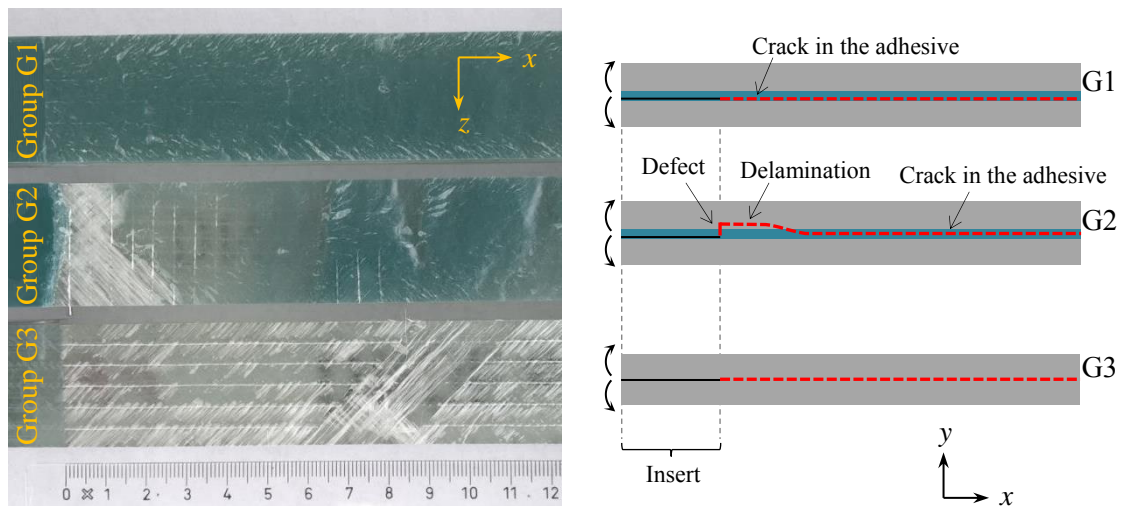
Crack propagation in the specimens; left: Fracture surfaces and right: sketches of the crack paths.
